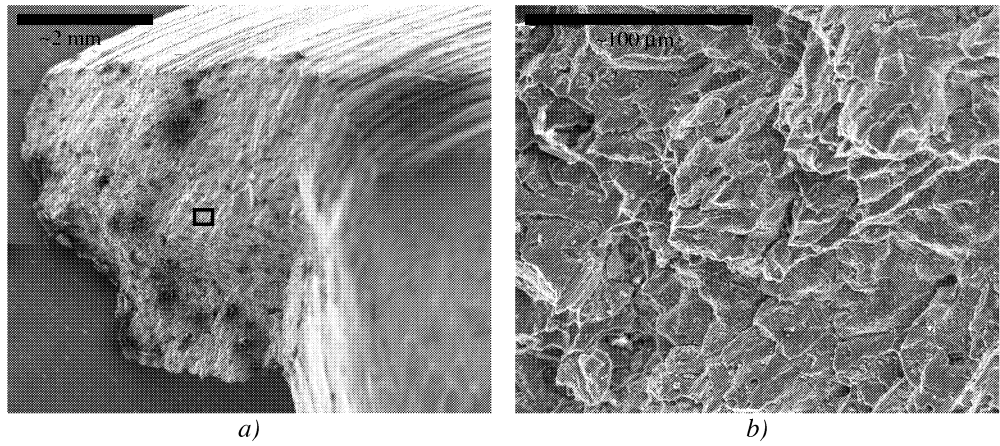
a) Scanning electron micrography of the fracture surface in the weld material, and b) details from the frame in a showing the structure.
